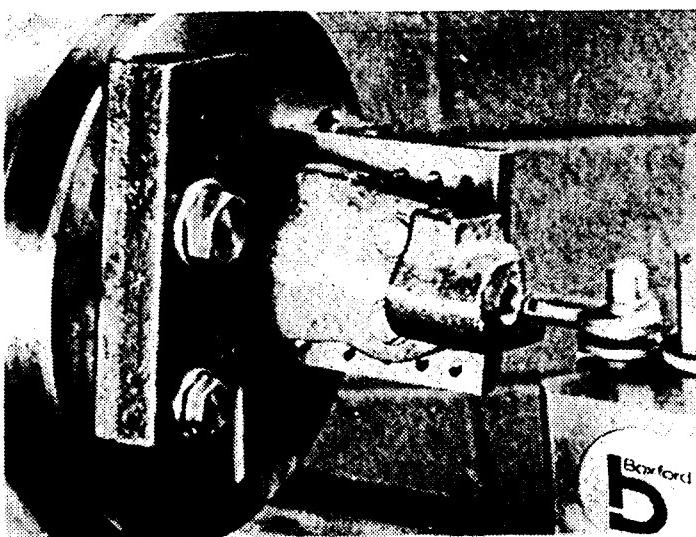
Boring a Component on Angle Plate Attached to Face Plate
